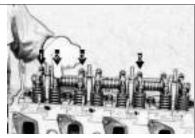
Valve Clearances Adjustment for Four-cylinder Engine
